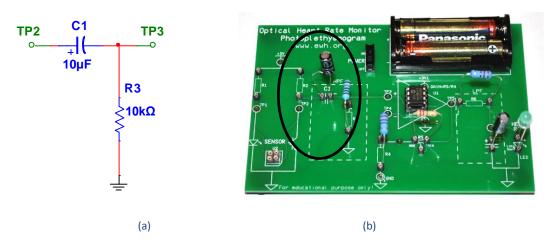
High pass filter schematic (a) and assembly on PCB.
